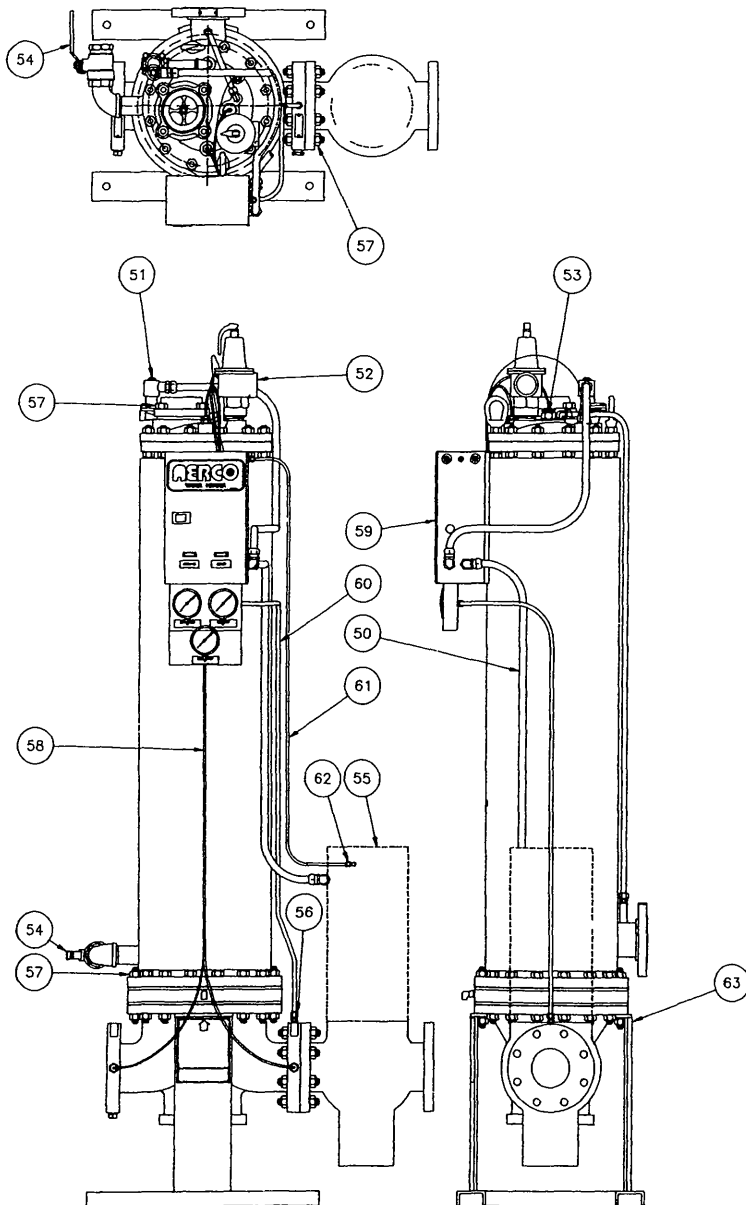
AERCO Model DW Packaged Heater Assembly and Parts List
